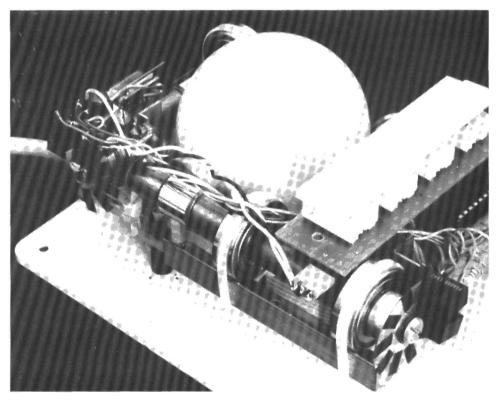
Side view of the ball assembly, showing the ball bearings of one spindle secured on to the base plate.
